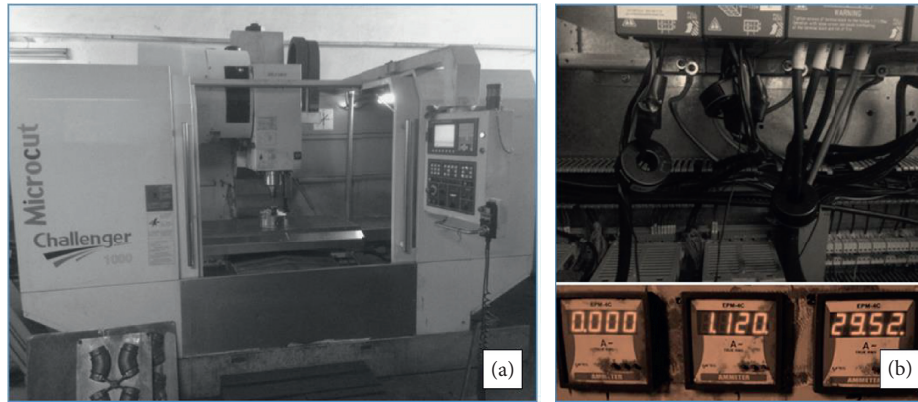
(a) Microcut 1000 CNC machining center. (b) Ammeter and current transformer drive connection.
